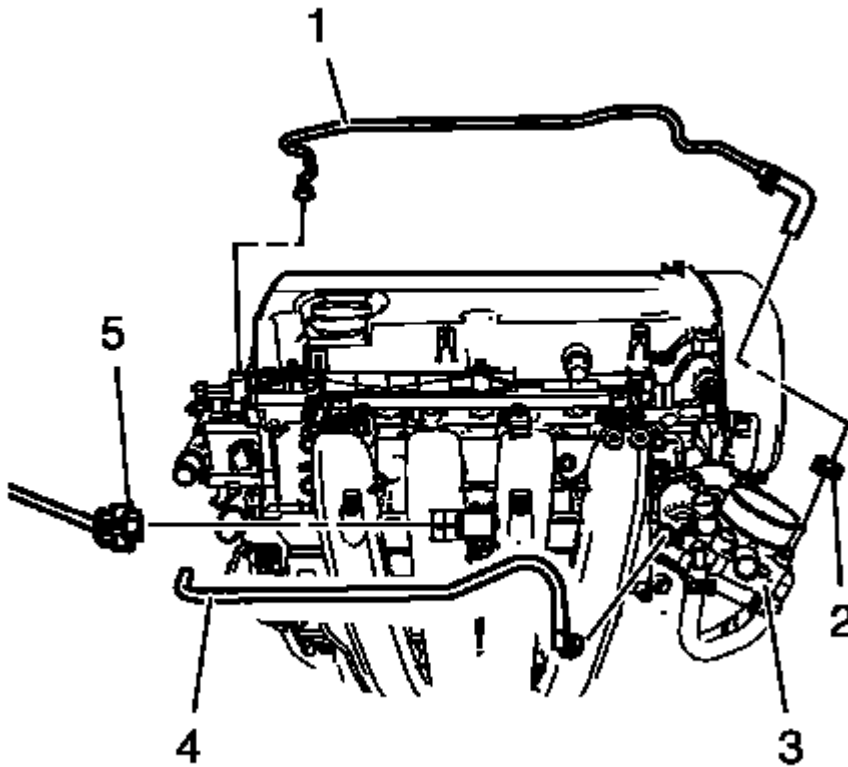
Throttle Body, Throttle Body Heater Inlet Hose And Throttle Body Heater Outlet Hose
